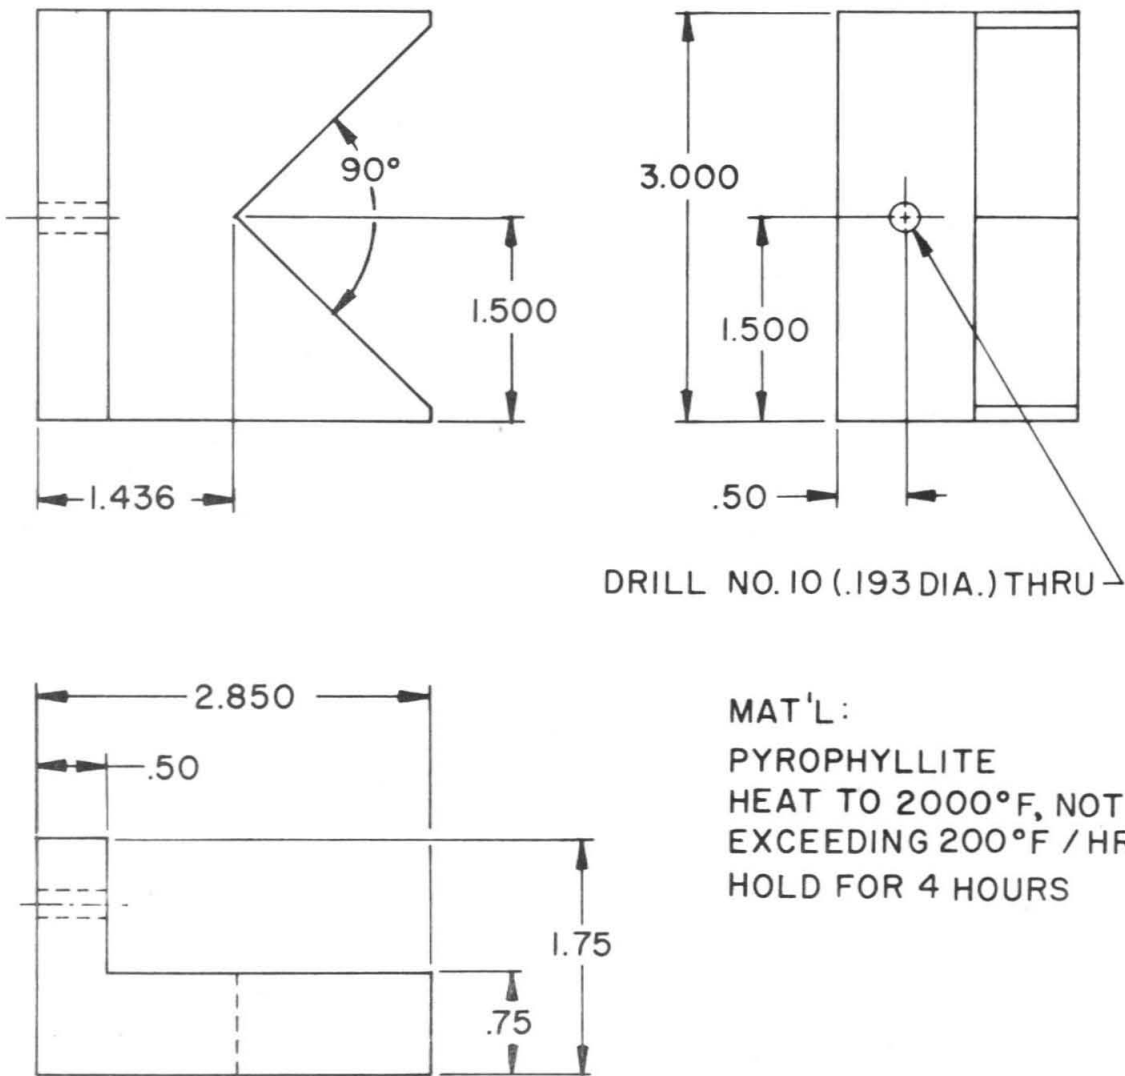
Drawing showing furnace mounting block. Dimensions are in inches.
